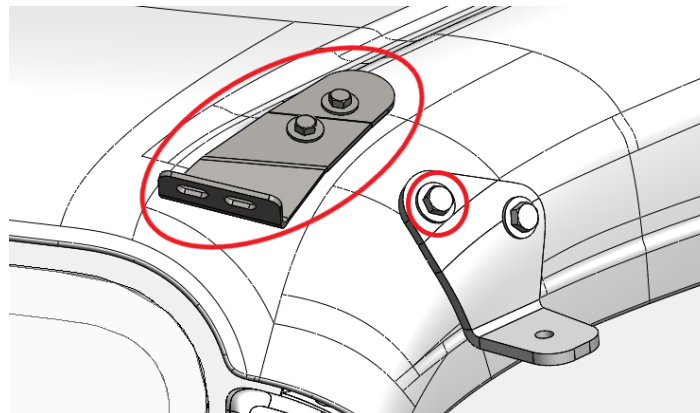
Bracket & Mirror Bolt to Remove (Driver side shown)
